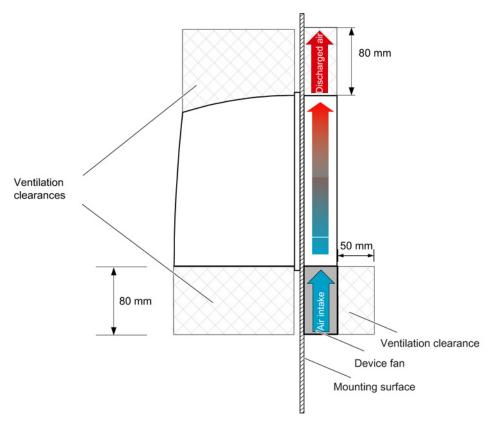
Cooling clearances for 300 mm wide components with external air cooling with mounted unit fan
